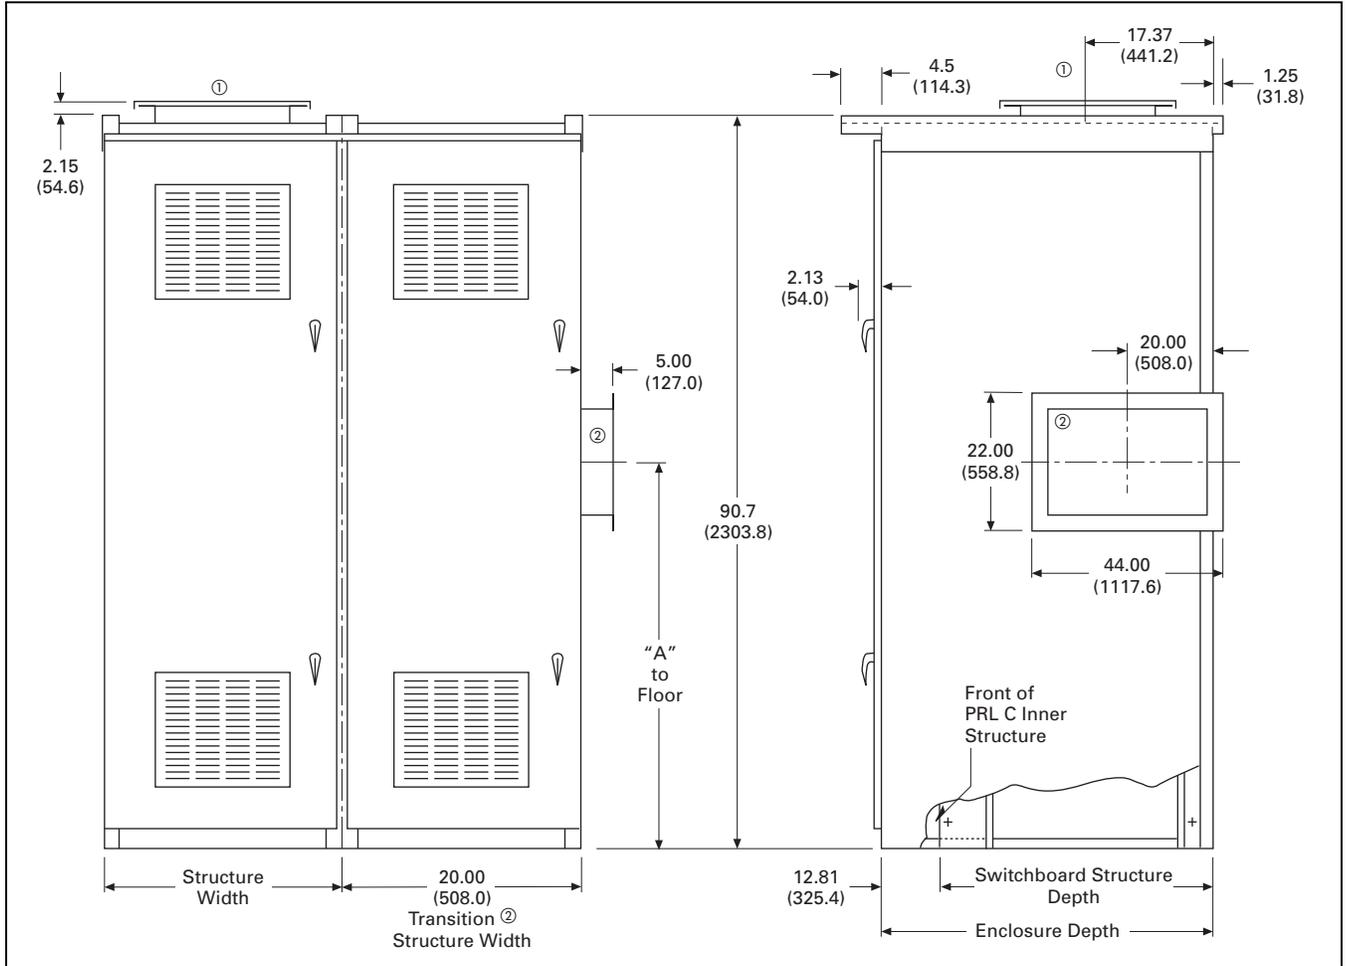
Front-Access—Non-Walk-In with Flat Roof—Dimensions in Inches (mm)
